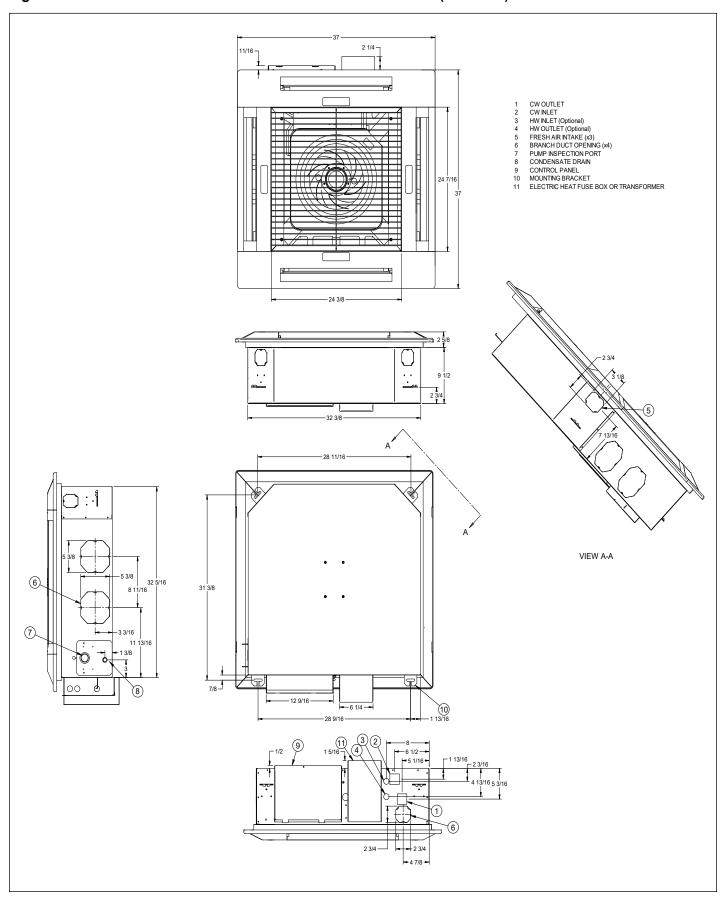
Dimensions - Large Chassis: SCW33 and SCW36 (in inches)
